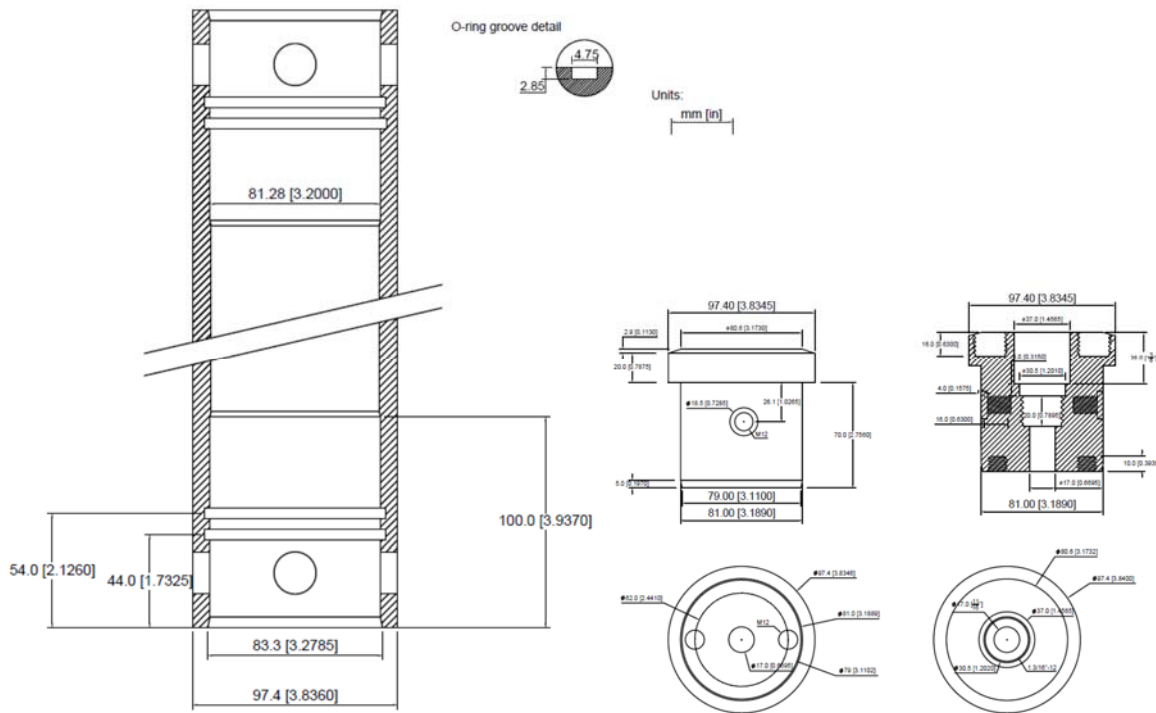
New dimension of the tool body (left) and bottom cap (right). The top cap is to be determined based on CSD design.
